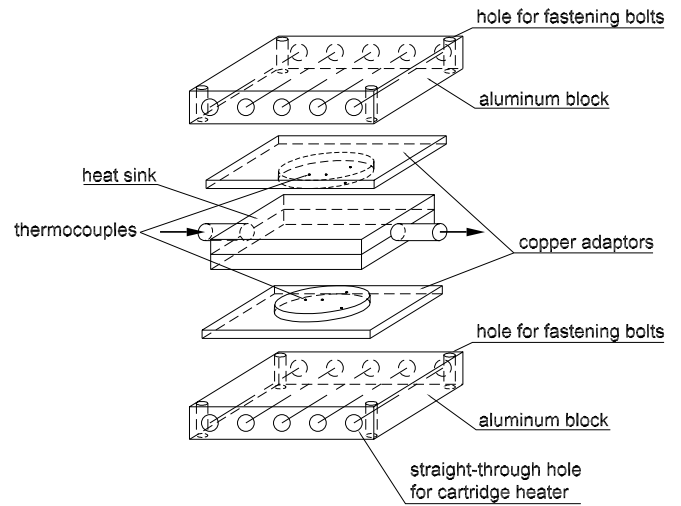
HEAT SINK - COPPER ADAPTOR - HEATER BLOCK ASSEMBLY
